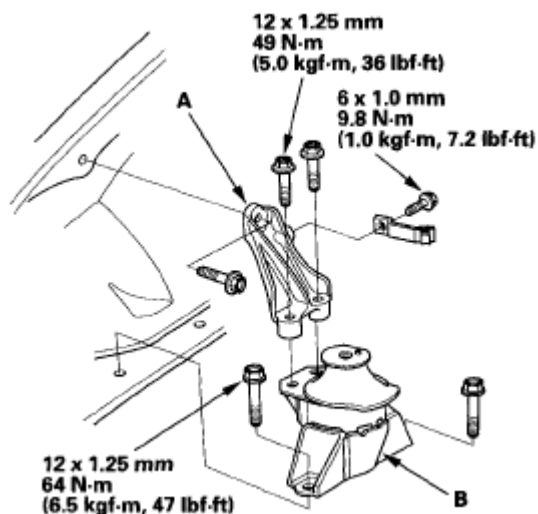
Identifying Side Engine Mount Stiffener And Side Engine Mount
